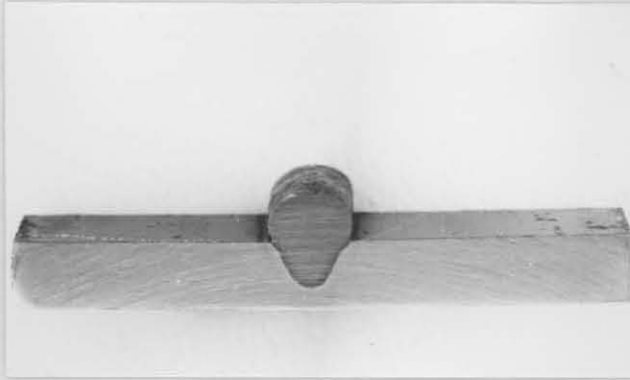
Bead-on-plate welded fusion line fracture toughness test specimen (6 mm x 10 mm x 55 mm).
